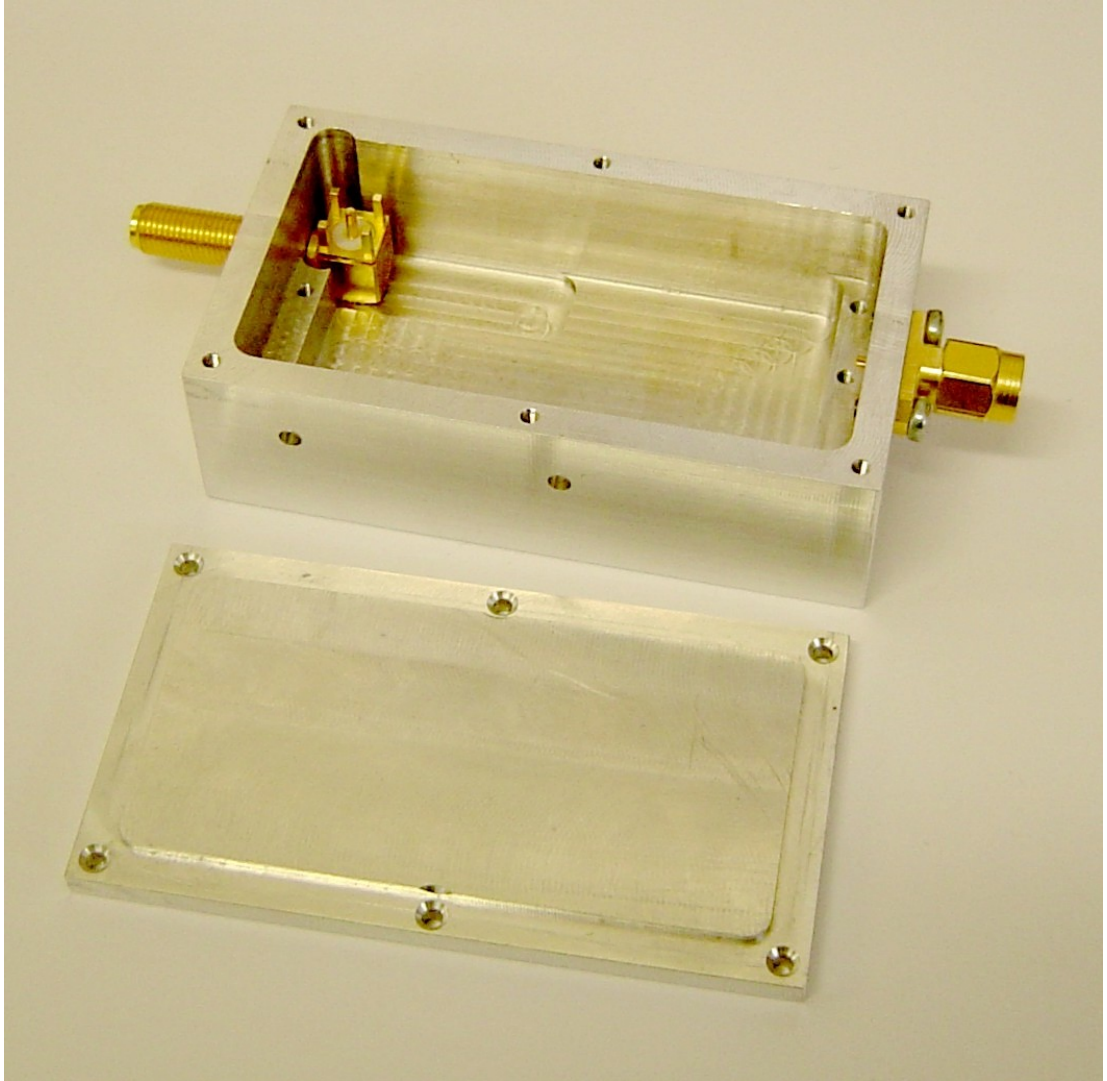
Milled box housing for PAD standard version duplexer and directional coupler components.
